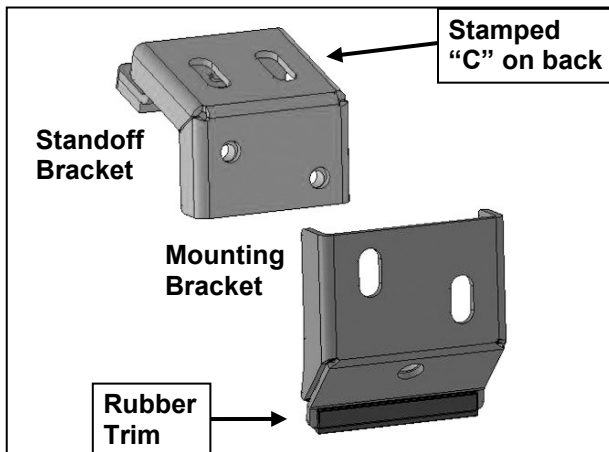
Front Standoff Bracket and Front Inner Mounting Bracket. Push Rubber Trim onto Mounting Bracket
